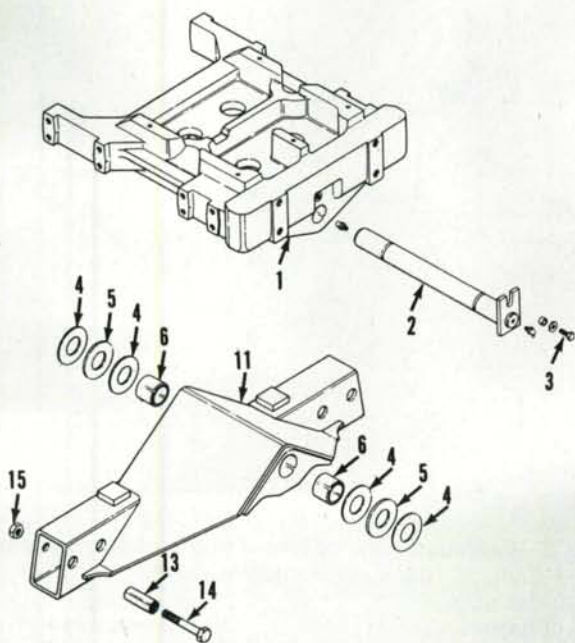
Exploded view of front axle and support used on two-wheel drive models.
